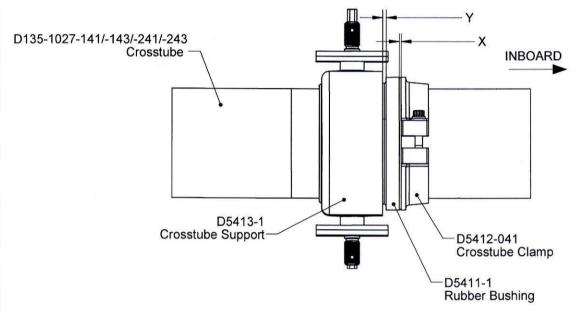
CROSSTUBE SUPPORT INSPECTION (VIEW LOOKING UP)
